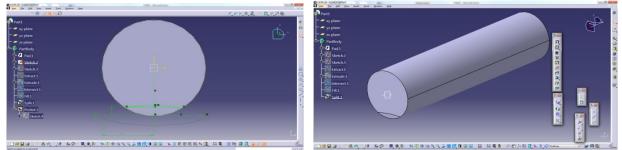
Geometric model of elliptical cracked shape. Fig3: Geometric model of circular cross-section cracked shaft.
